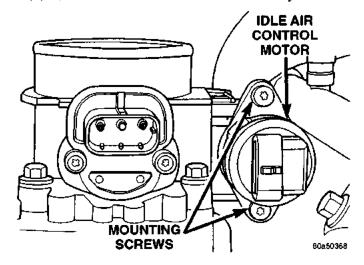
Mounting Bolts (Screws)—IAC Motor
